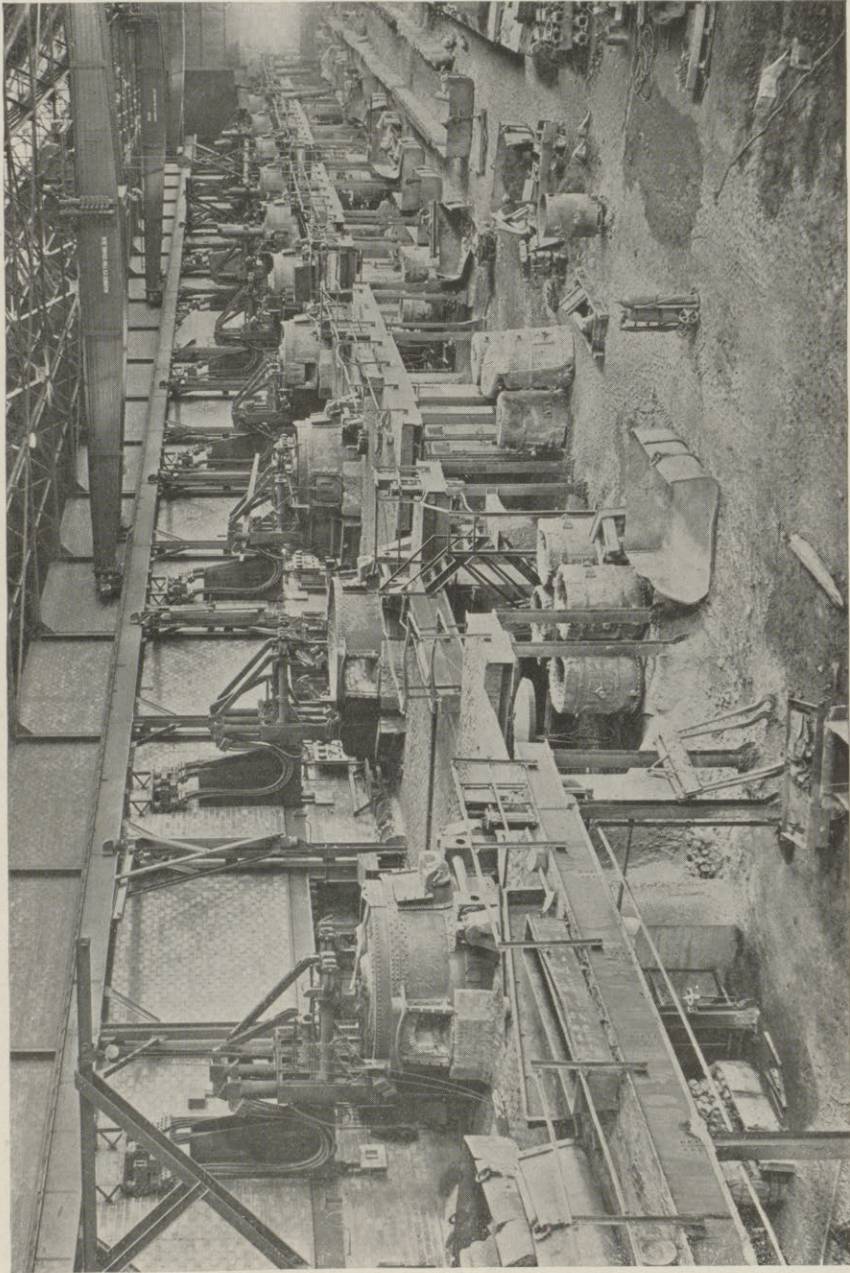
British Forgings, Toronto. Electric Furnaces.
